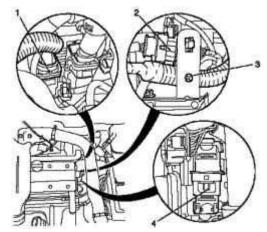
Wiring harnesses, engine: 1 - the wiring harness connector module engine management, 2 - the wiring harness connector oxygen sensor, 3 - wire clamps, 4 - the wiring harness connector
